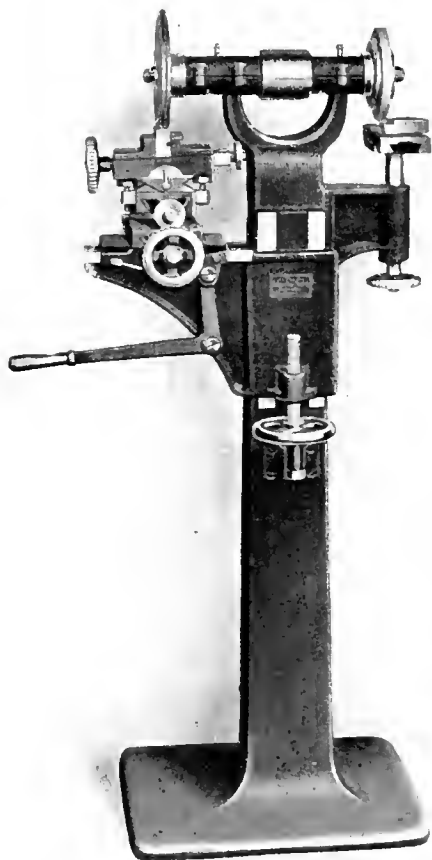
Chaser or Die Grinder built by the Geometric Tool Co.
